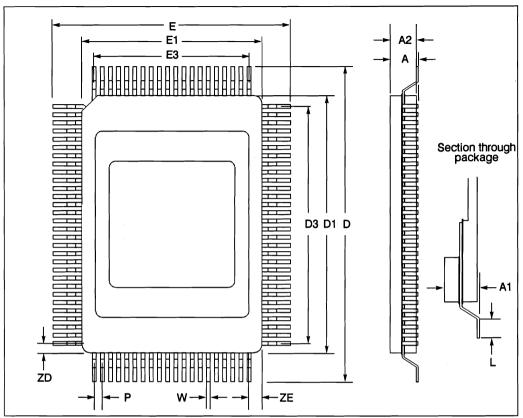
100 pin ceramic o	uad flatpack	package	dimensions
